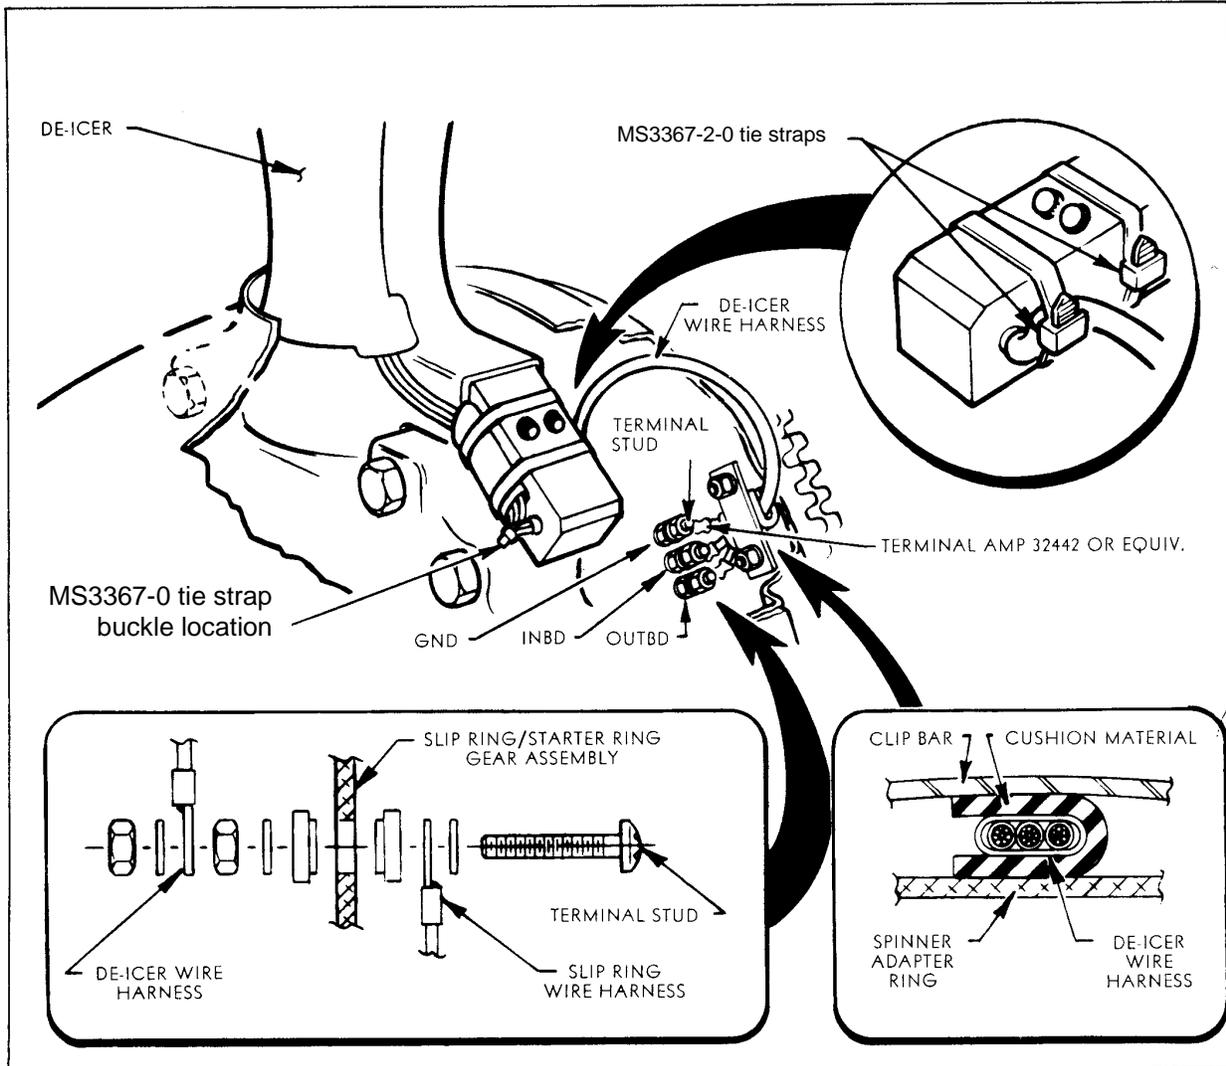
Assembly and Wiring Details - Slip Ring/Starter Ring Gear Assembly
